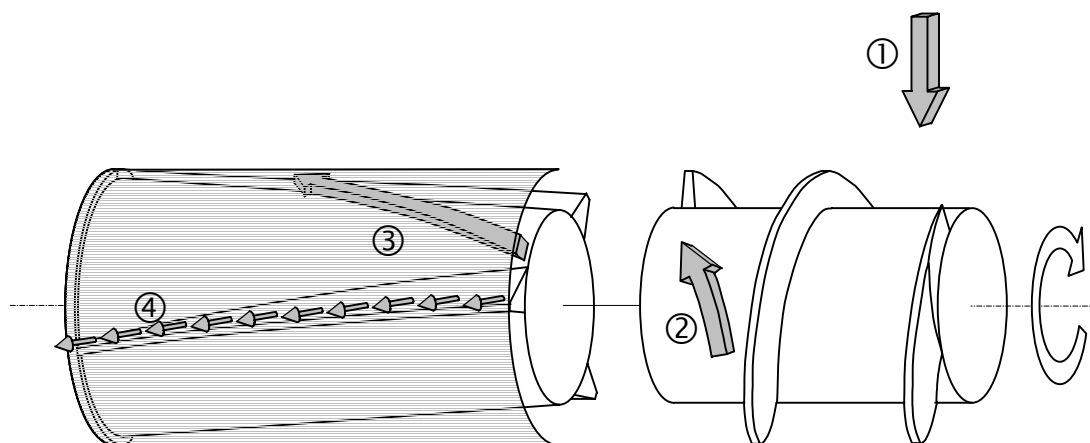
Exploded drawing of one half of a twin-screw radial screen extruder
